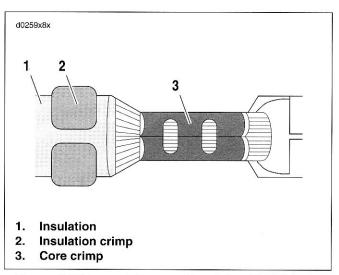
Inspect Core and Insulation/Seal Crimps
